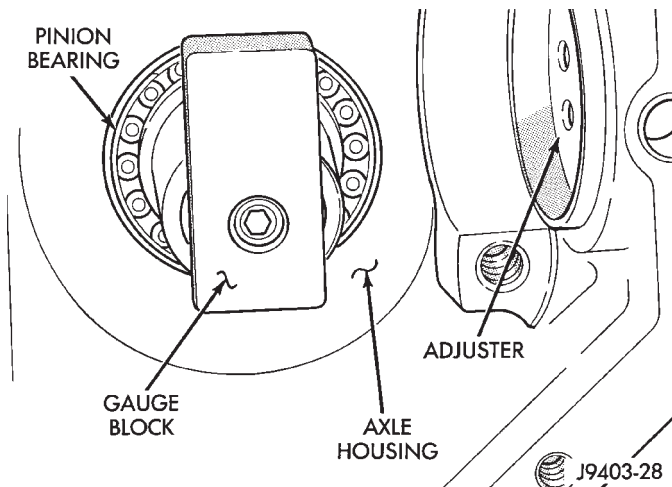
9 1/4 Axle Pinion Adjustment Tools
